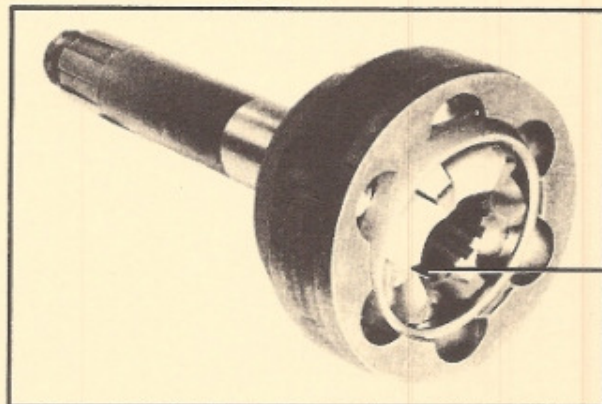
Bell Joint Assembly (Half-Shaft Assembly)
